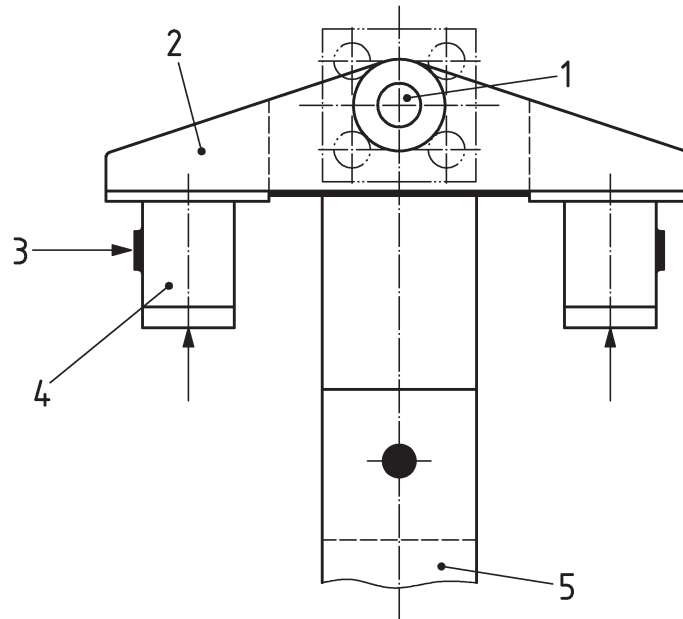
Example of cross-tension test specimen in welding jig
